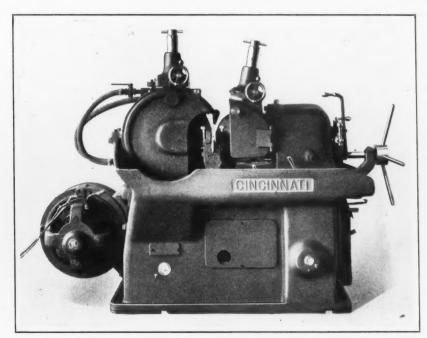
Cincinnati Centerless Grinder for Both Straight Cylindrical and Shouldered Parts
